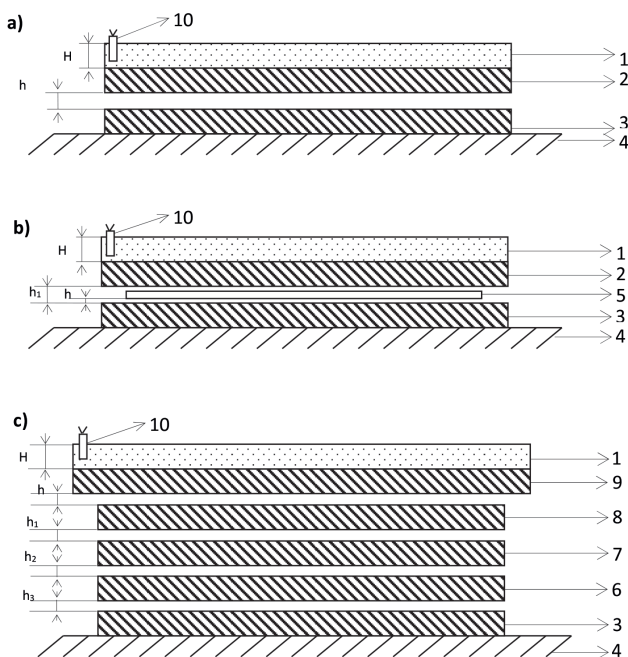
Explosive cladding setup: a) direct cladding, b) cladding with interlayer, c) multilayer cladding, where: H - EX load height, h,h1,h2,h3 - clad plate propelling distances, 1 - explosive material, 2 - cladding plate, 3 - base plate, 4 - ground/anvil, 5 - interlayer, 6,7,8 - consecutive cladding plates, 9 - clad plate, 10 - electric detonator
